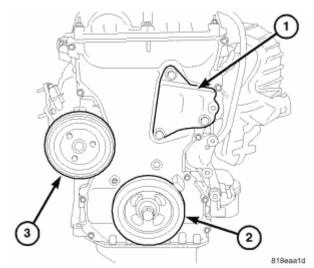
RIGHT ENGINE MOUNT BRACKET Courtesy of CHRYSLER LLC
